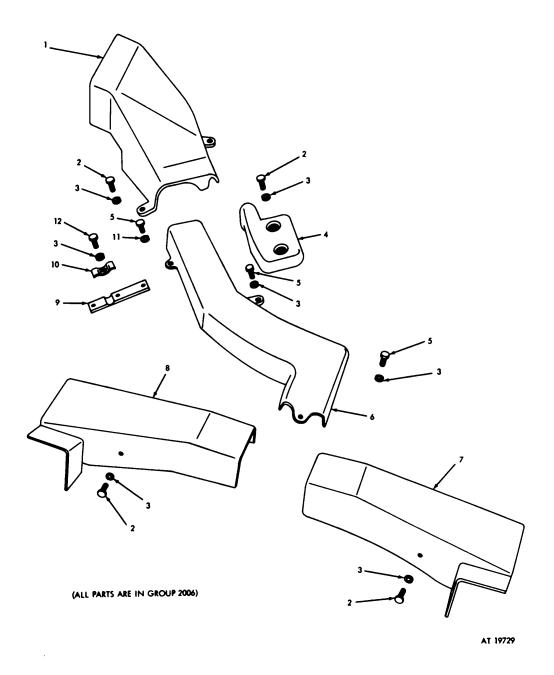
Hydraulic system armor guards (sheet 1 of 5)-partial exploded view.
